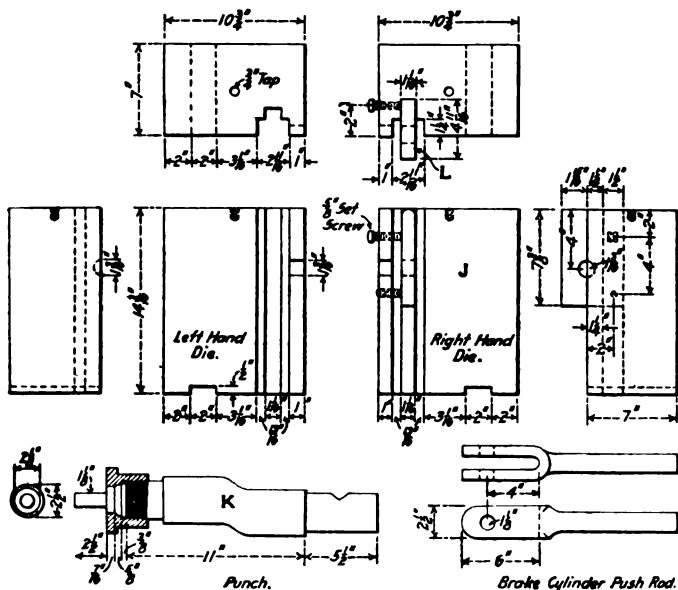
Dies for Punching Pin Holes In Brake Rod Jaws.
